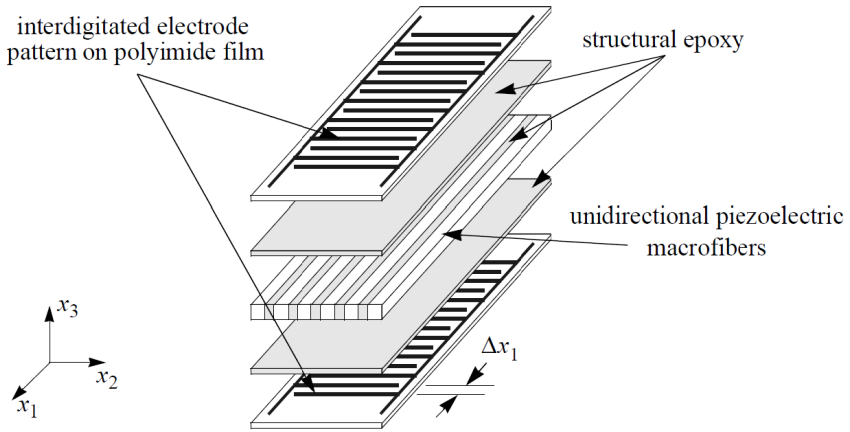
Exploded view of Macro Fiber Composite Actuator [217].
